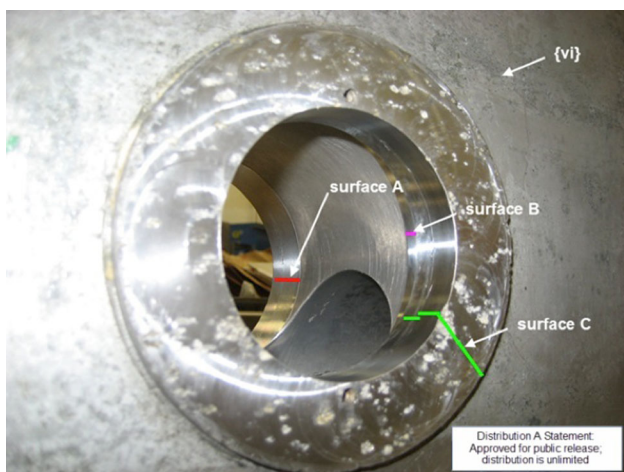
Machined corrosion damaged surface of the actuator shown in Fig. 1
